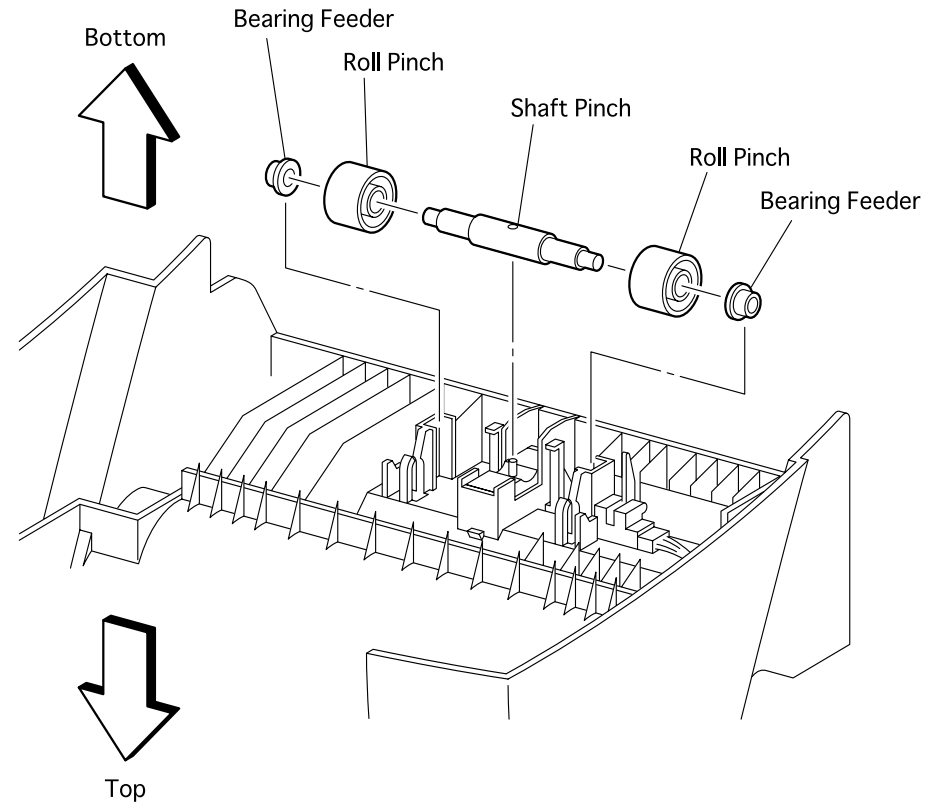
Roll Pinch and Shaft Pinch Removal
